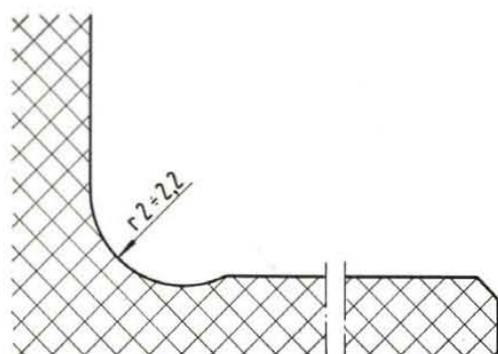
Fillet radii for chain end main bearing journal shoulder.
